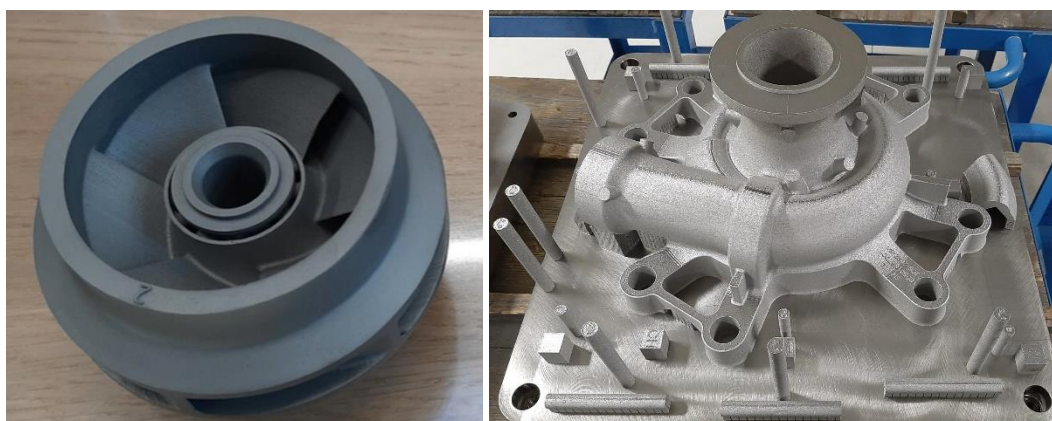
Turbo-pump demonstrator showing parts designed and manufactured by GKN
